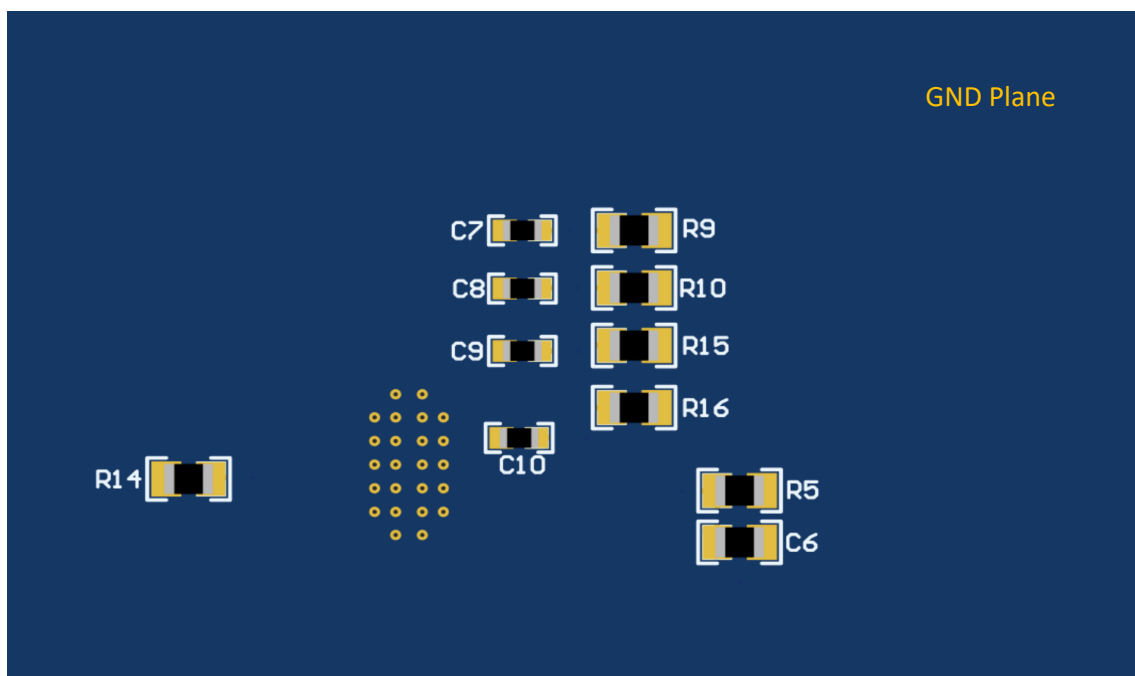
Printed Circuit Board Layout Example: Bottom Layer 3D View
